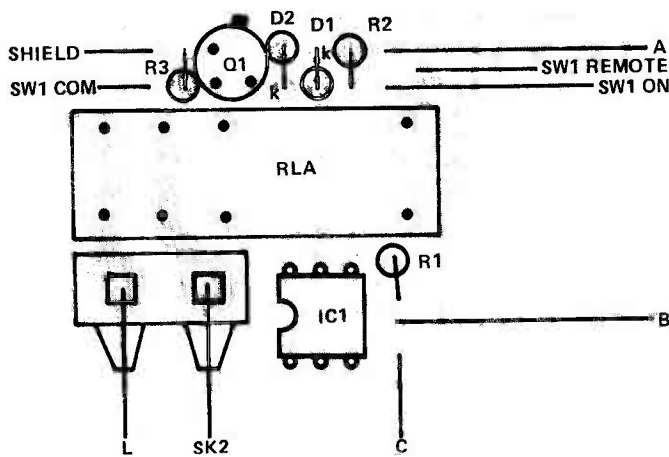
Component overlay. The terminal block is secured by tightening the lower pair of screws onto wires soldered to the PCB.
